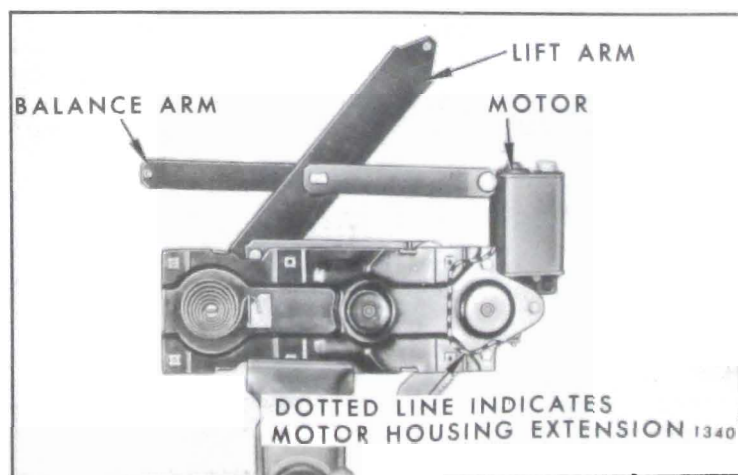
Door Window Regulator and Electric Motor Assembly
